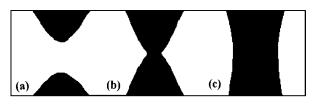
Schematic diagram of the weld pool: (a) partially penetrated; (b) barely penetrated; (c) fully penetrated.
